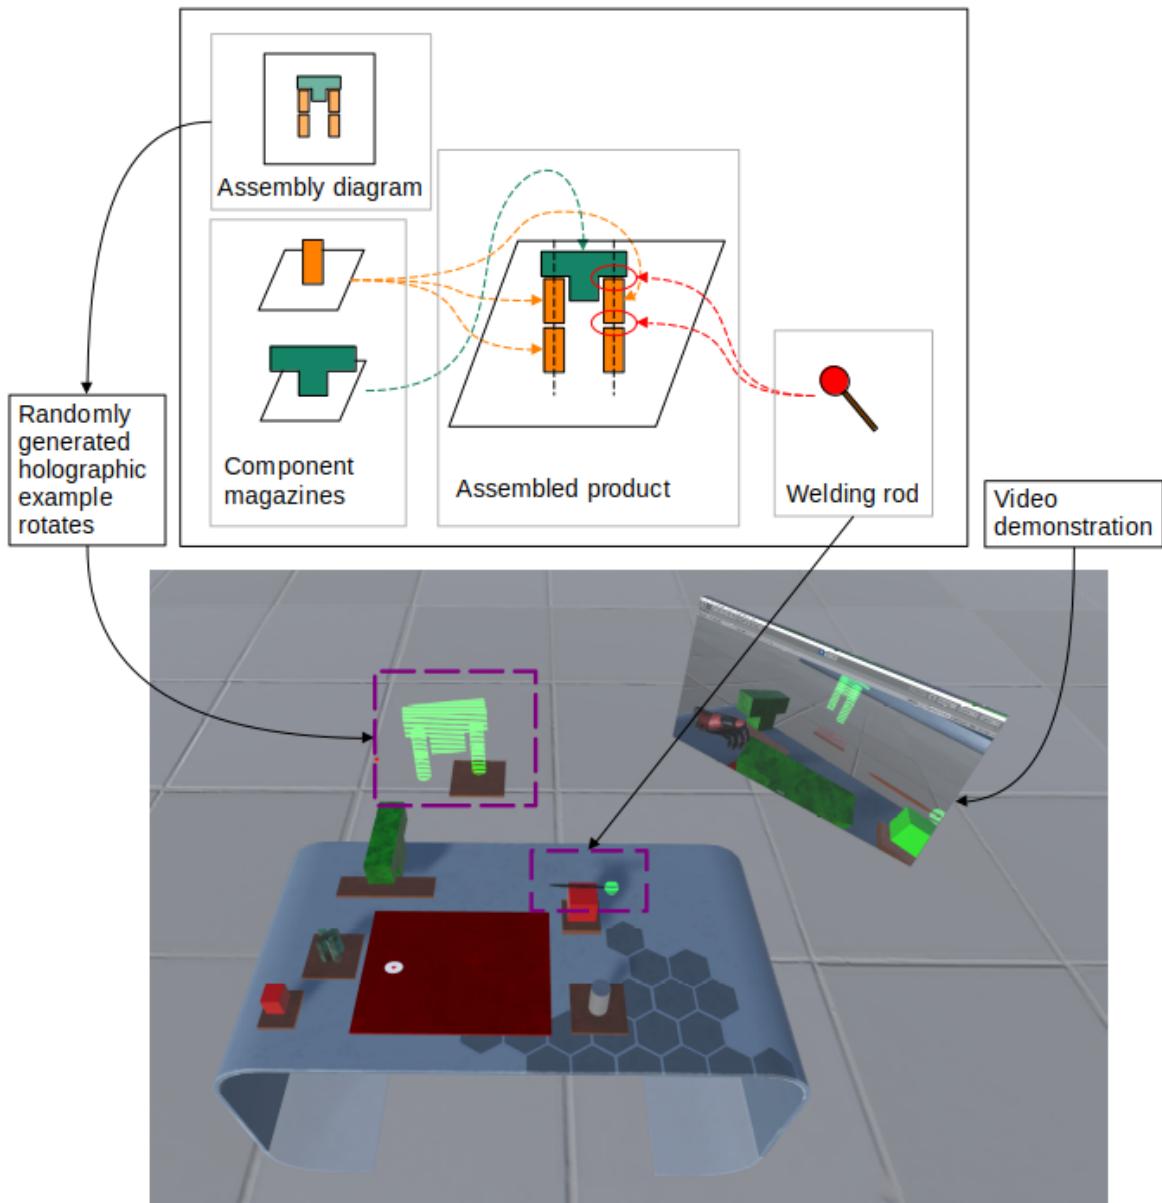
The final assembly task joining is shown schematically (above) and in VR (below). The operator selects components from magazines and welds them together. The final assembly is illustrated via a hologram.
